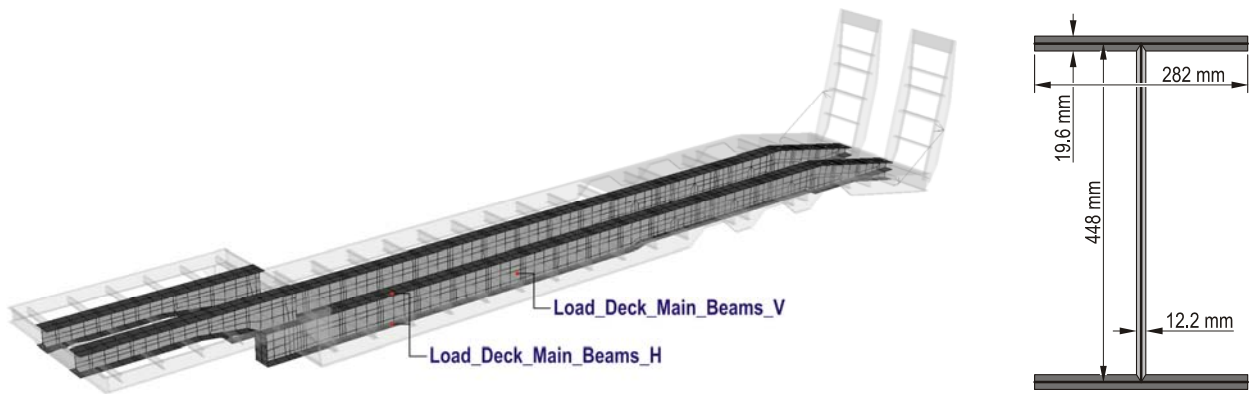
FE model of the longitudinal main beams and their cross-section
